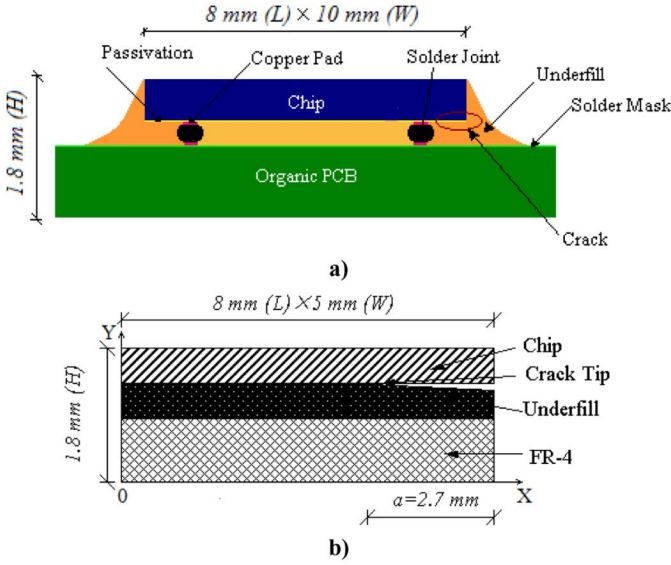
Schematic diagram of the assembly to be studied: (a) flip chip package and (b) silicon/underfill/FR-4 assembly.
